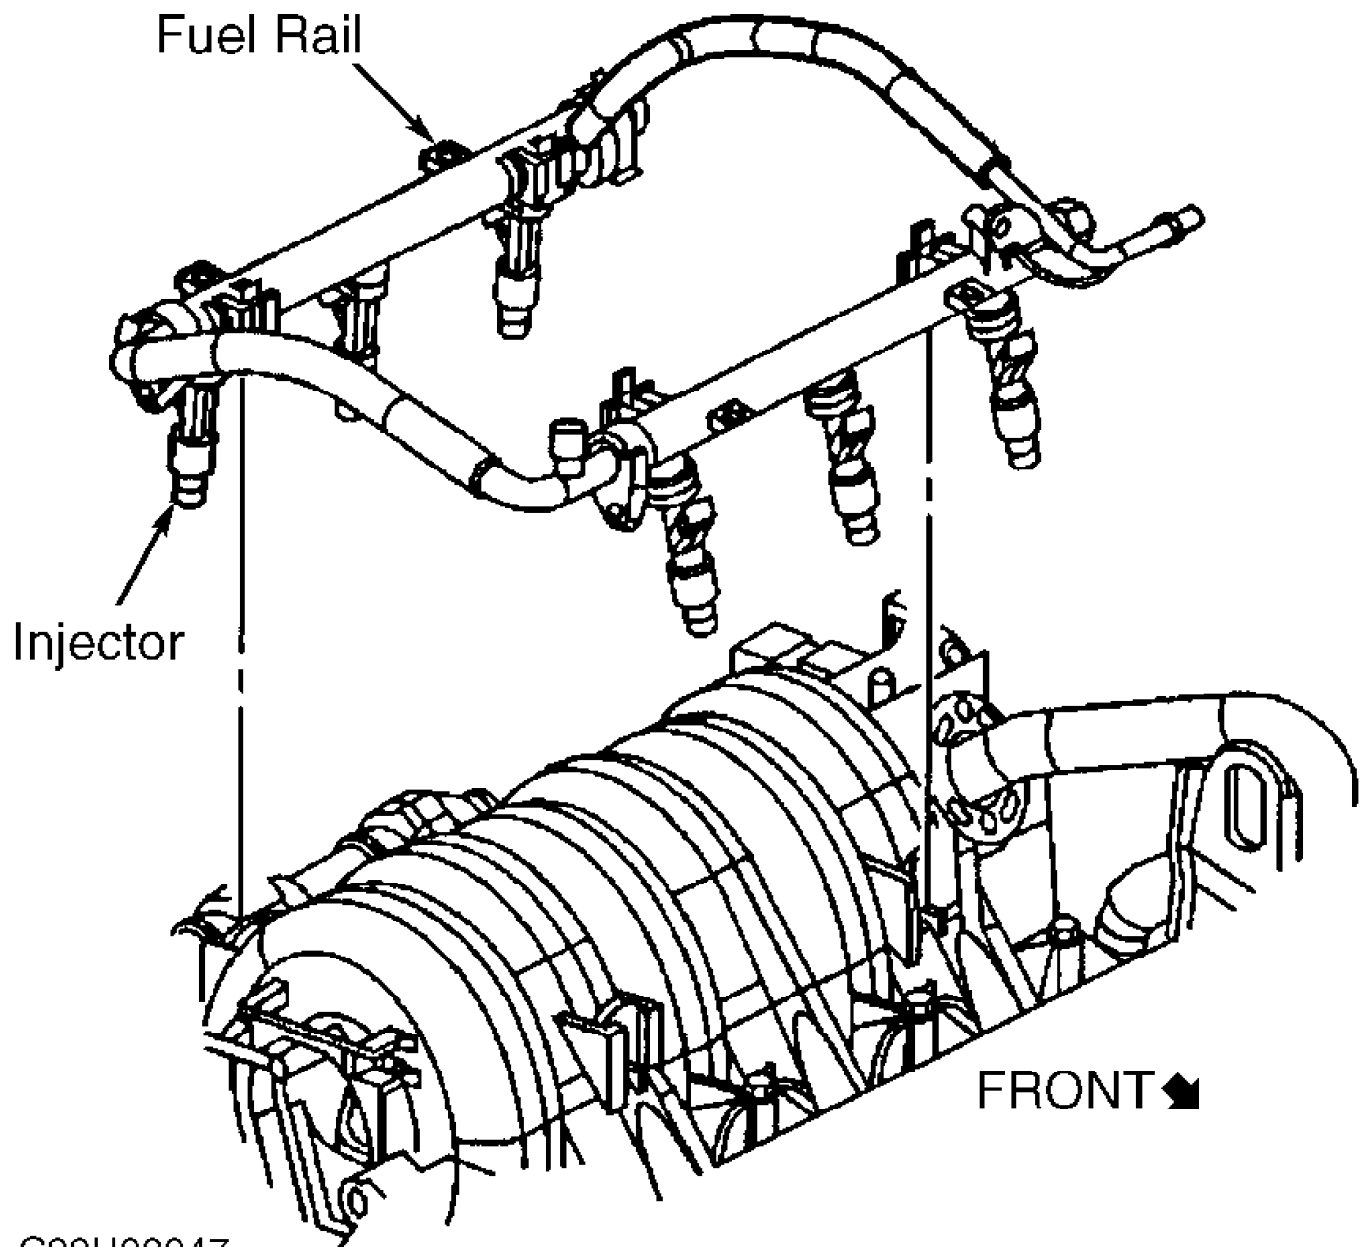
Locating Fuel Rail Assembly Components (3.0L - VIN R)
